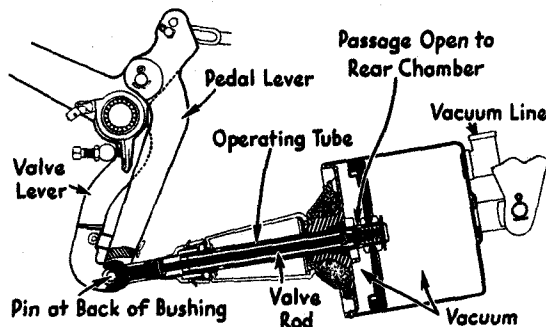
Brake assister in normal released position. The vacuum and atmospheric valve is all the way forward uncovering the passage in the operating tube and opening the front chamber to the intake vacuum line through the rear chamber
